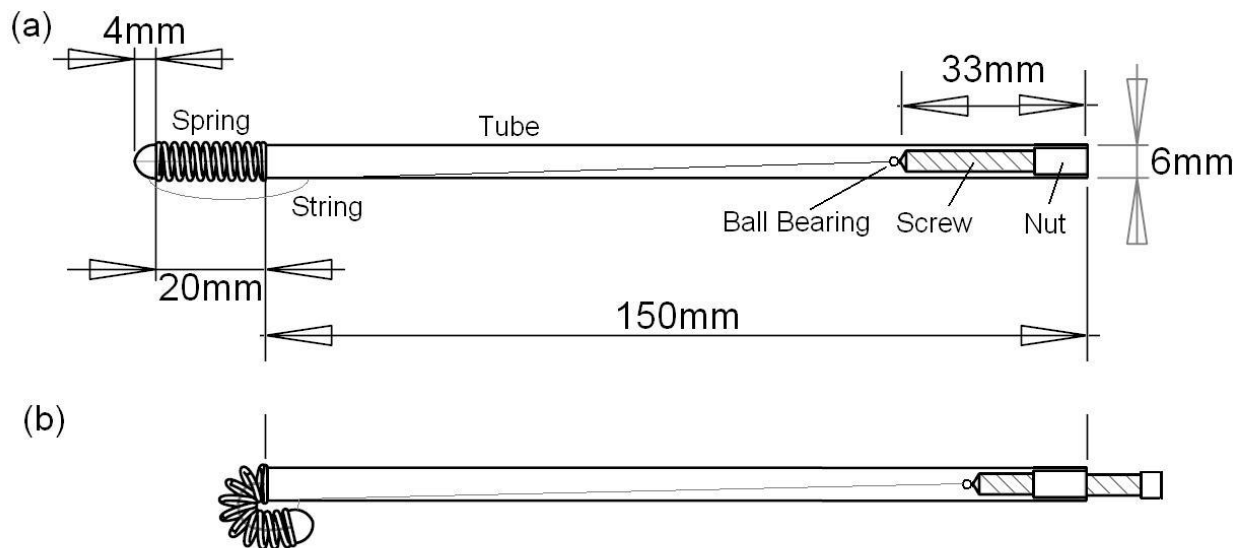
Schematic of the mechanical design of the *PiccoloProbe* in a) its extended position, and b) when coiled
